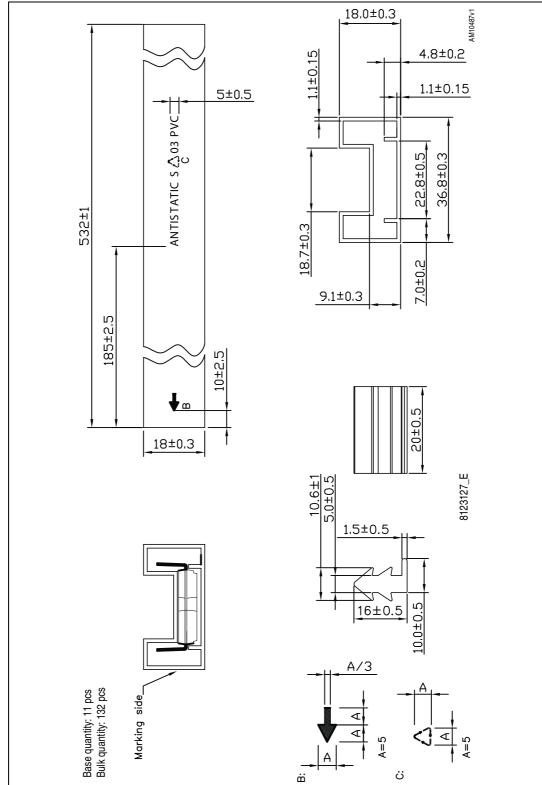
SDIP-25L shipping tube type B (dimensions are in mm.)
